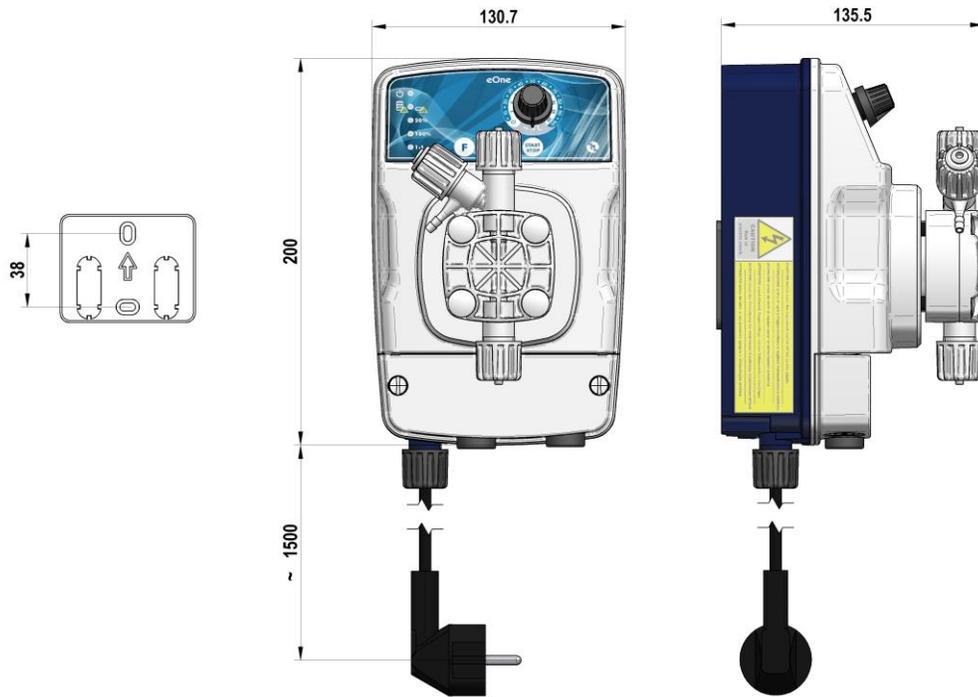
Dimensions in mm. Plate for wall mounting.
